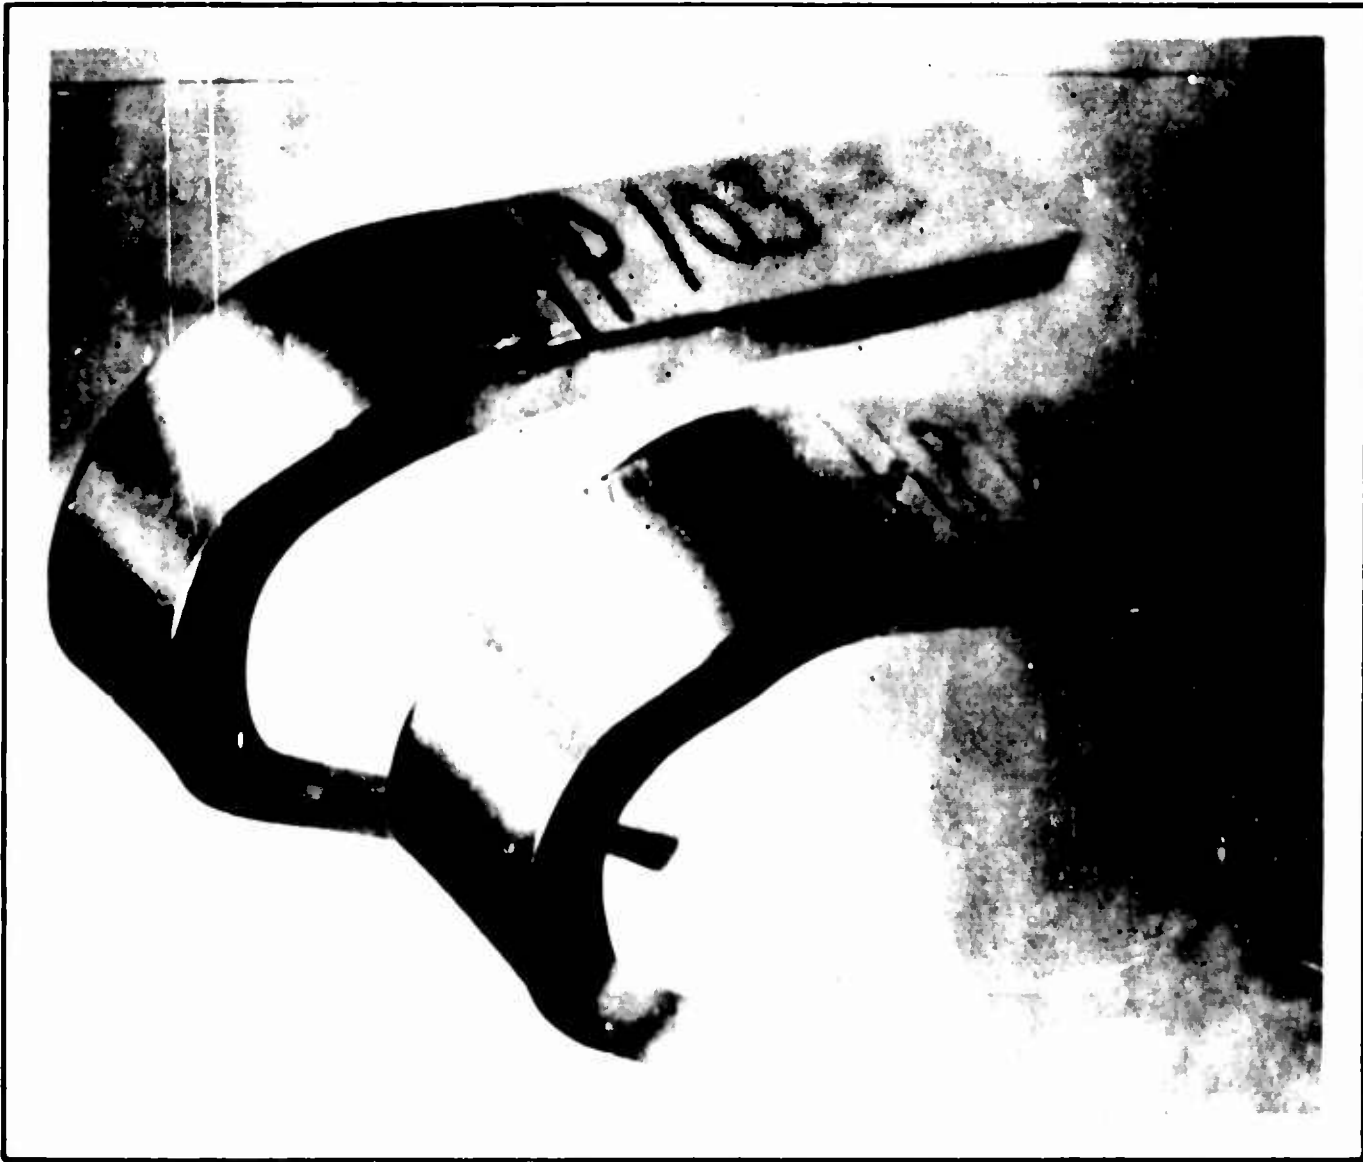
Bend Tests  $\frac{3}{8}$  in. Thick x 1 in. Showing Full Cold Bend Developed With No Evidence of Cracking (Courtesy of Republic Steel Corporation).
